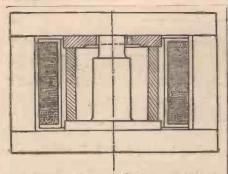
Another method of magnetizing, in which the complete magnet assembly is placed within a field winding with iron yoke.
